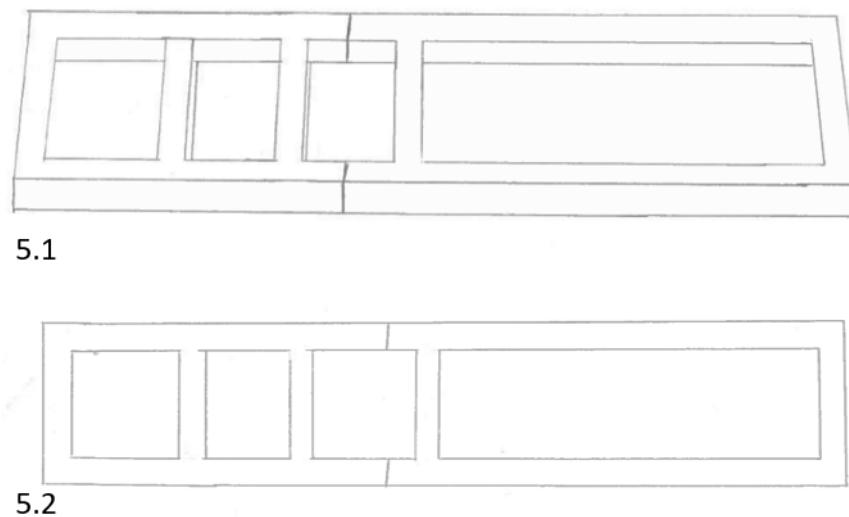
3d view boom (5.1) and top view boom (5.2)
